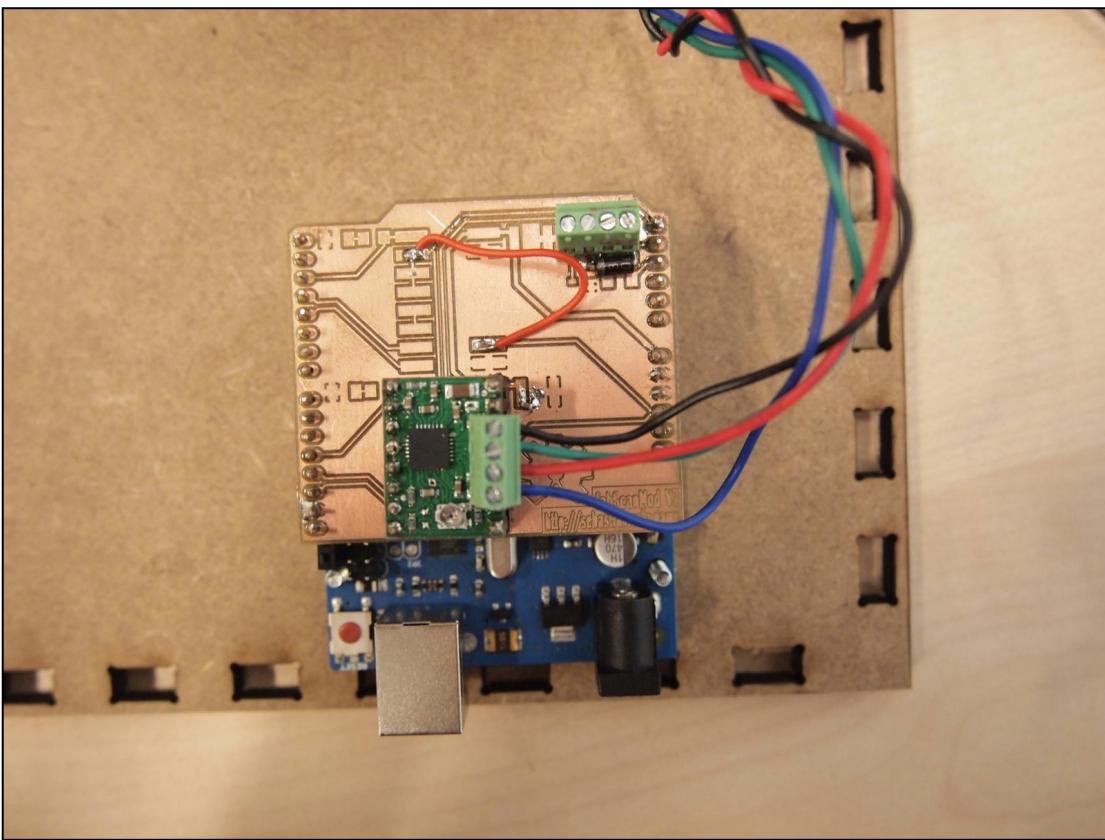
Connect the stepper motor cable with the Fabscan shield.
